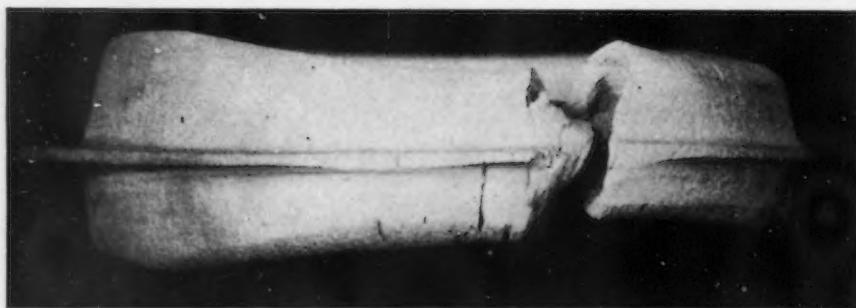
Partially completed hammer-upset forging which has ruptured.
